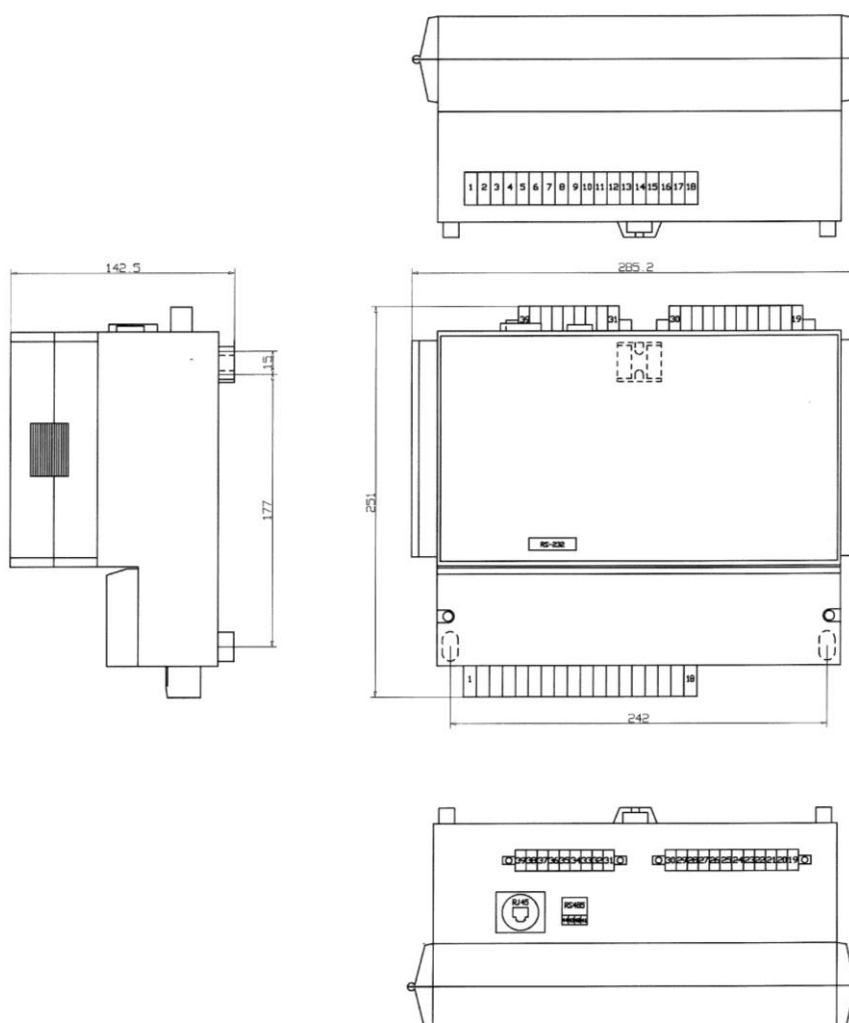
RRTC-3 relay surface mounting enclosure dimensions
